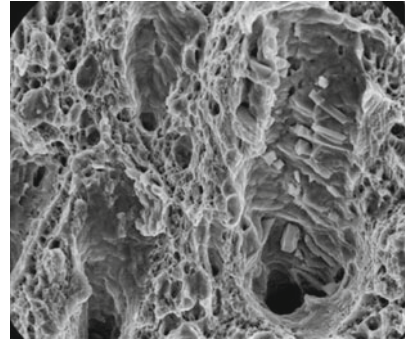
Fracture surface with voids containing fractured niobium carbids, material X10CrNiNb18-10
